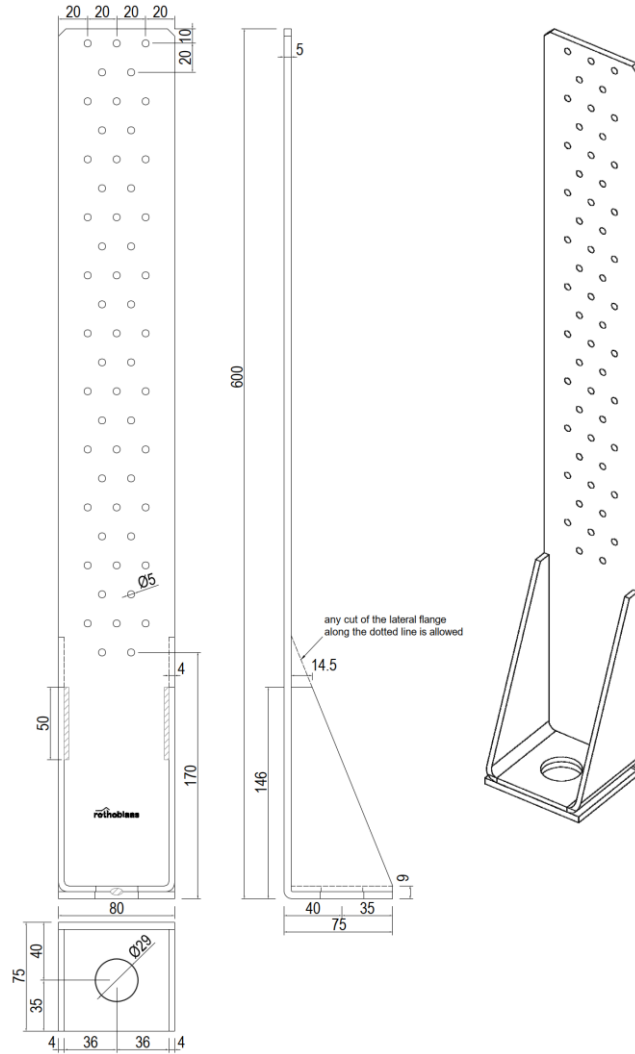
Dimensions of Rotho Blaas WHT55 hold down.
